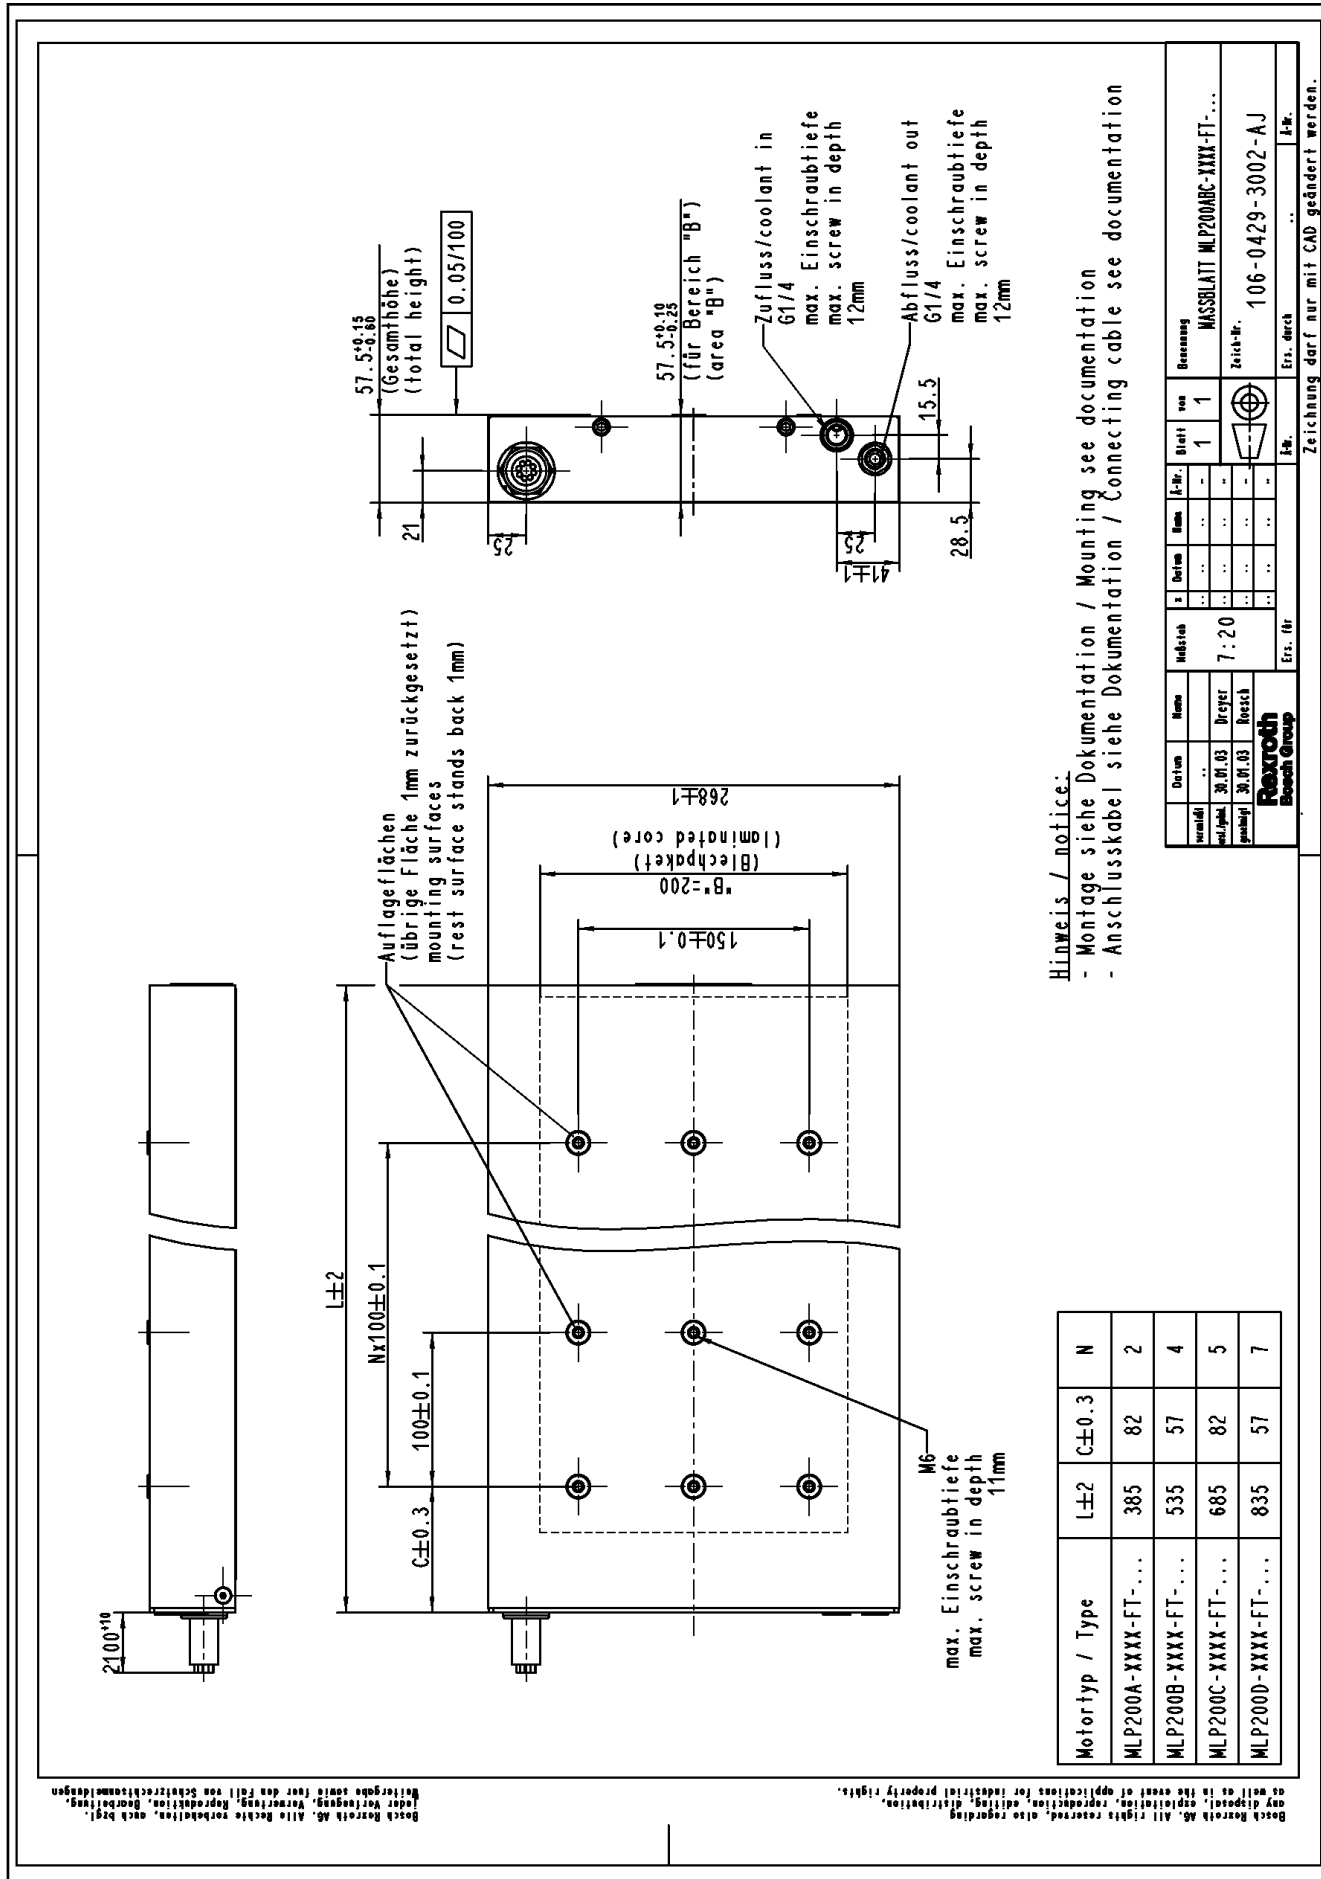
Primary Part MLP200 with Thermo Encapsulation
